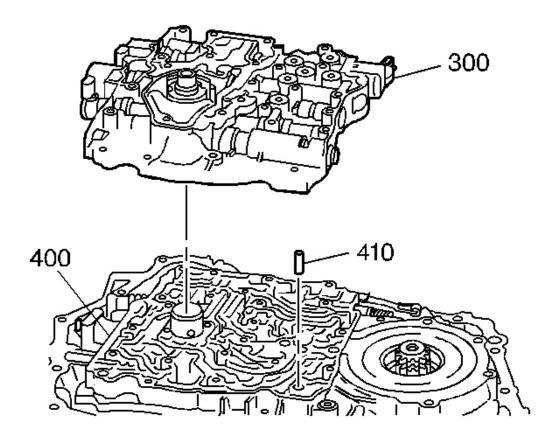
Installing Control Valve Body Alignment Sleeve Into Case Cover Courtesy of GENERAL MOTORS CORP.
